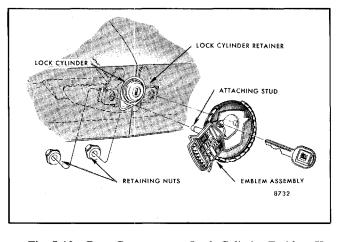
Rear Compartment Lock Cylinder Emblem K Style
